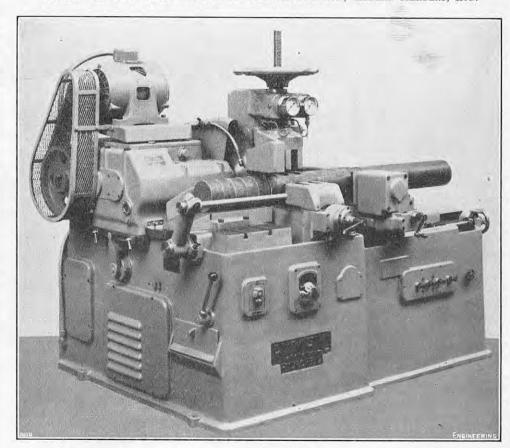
Automatic Cold-Sawing Machine; S. Russell & Sons, Ltd.
